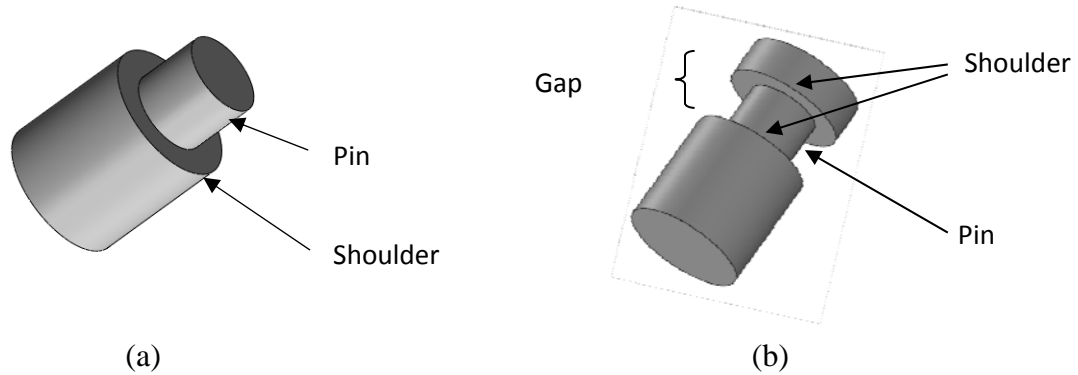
Illustration of tool types in FSW. (a) Single sided shoulder –CFSW.
